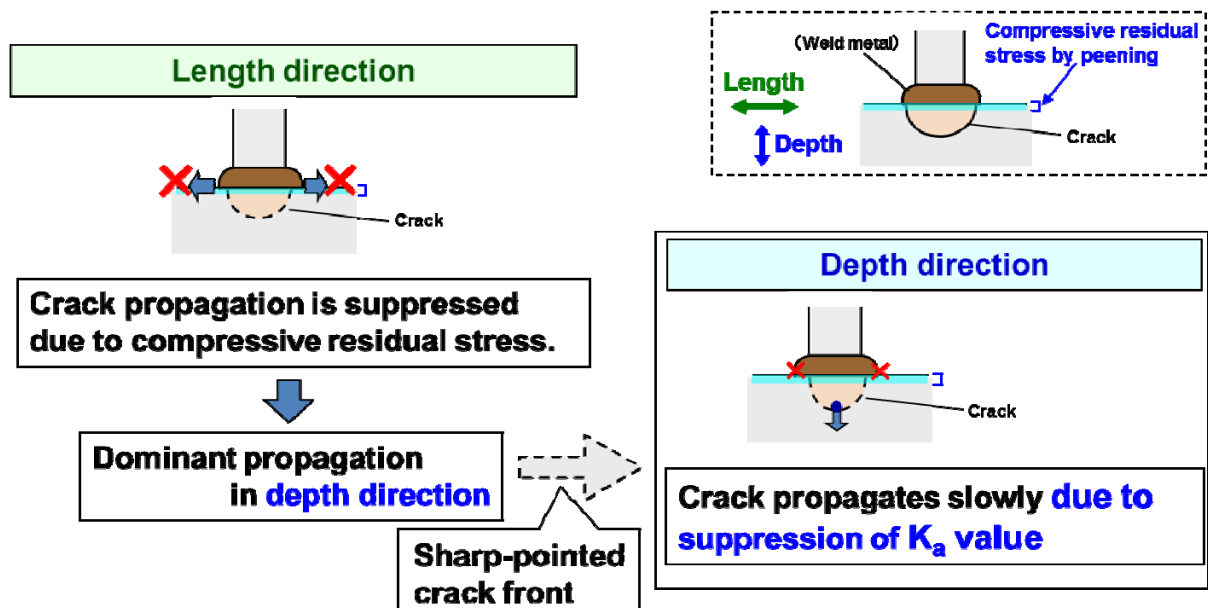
Surface fatigue crack propagation behavior in gusset weld joint which is applied peening
